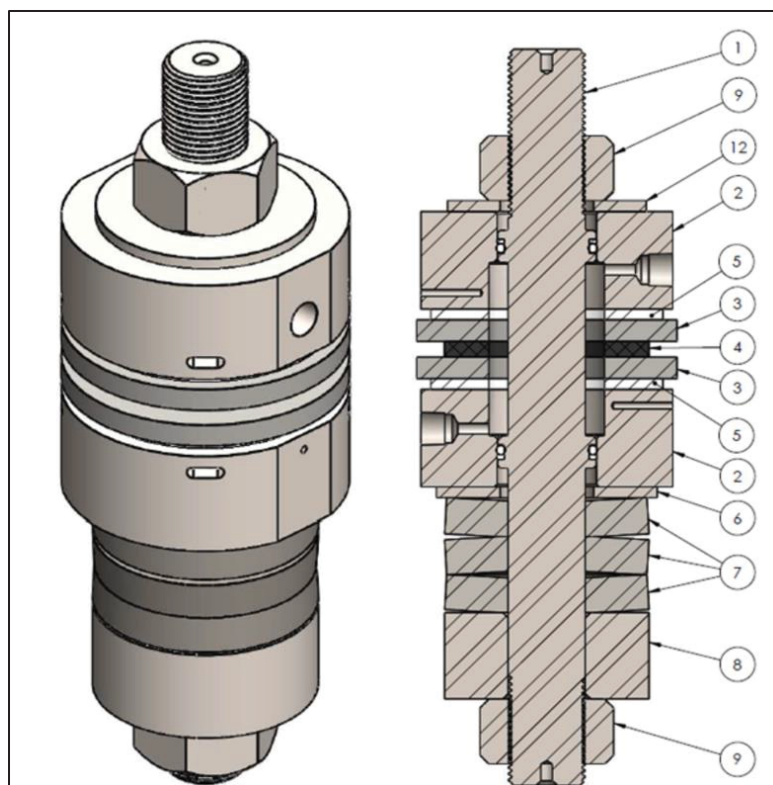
Test fixture and identification of each section. 1- Central stud; 2- Compression plate; 3- Specimen plate; 4- Gasket; 5- Rubber gasket; 6- Plain washer; 7- Belleville washer; 8- Load ring; 9- Nut; 10- O-Ring (between the central stud and the compression plates); 11- Back-up ring (between the central stud and the compression plates); 12- Plain washer
